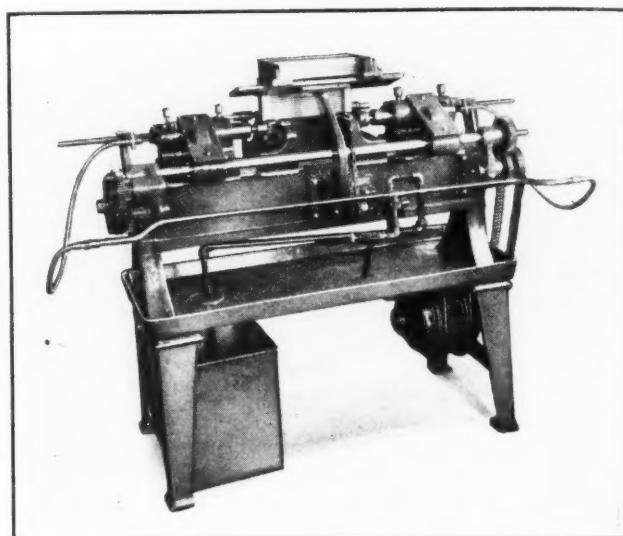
Rear View of the Double-end Machine illustrated in Fig. 1
